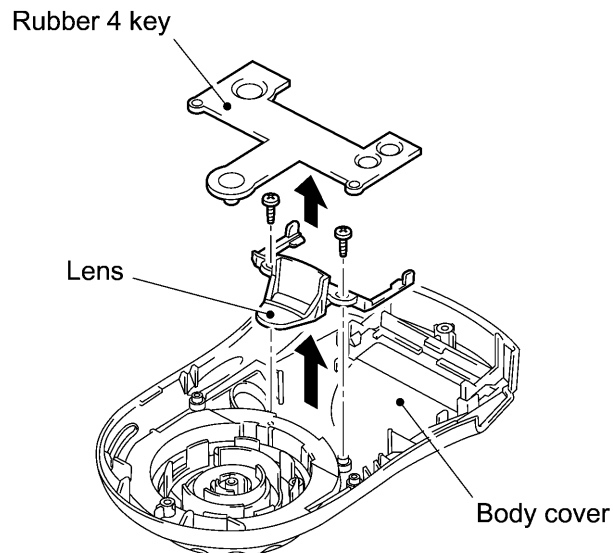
Removing the Rubber 4 Key and Lens
